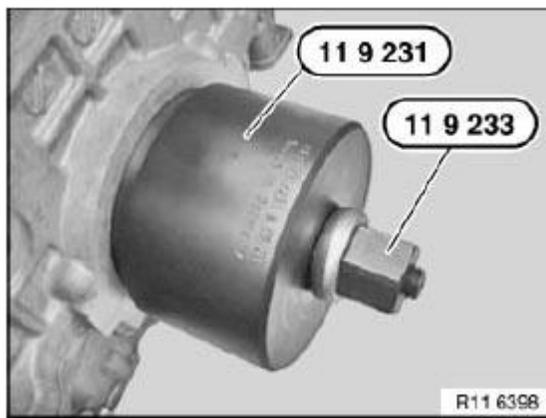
Installing Crankshaft Seal With Special Tool 11 9 231 In Conjunction With Special Tool 11 9 233
